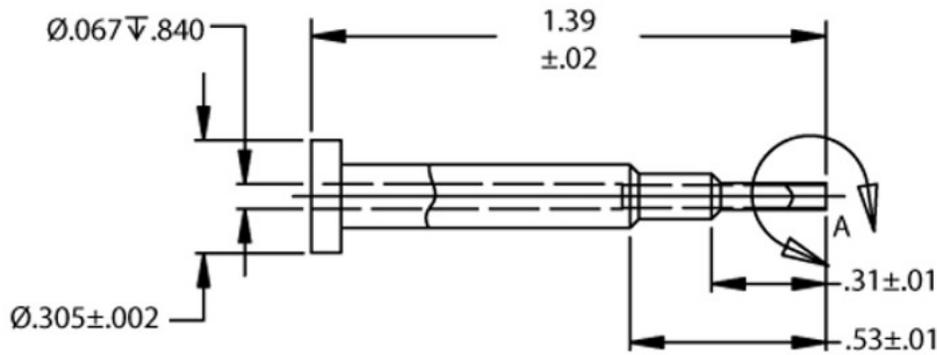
PROBE DIMENSIONS FOR SIZE 22 CONTACTS
